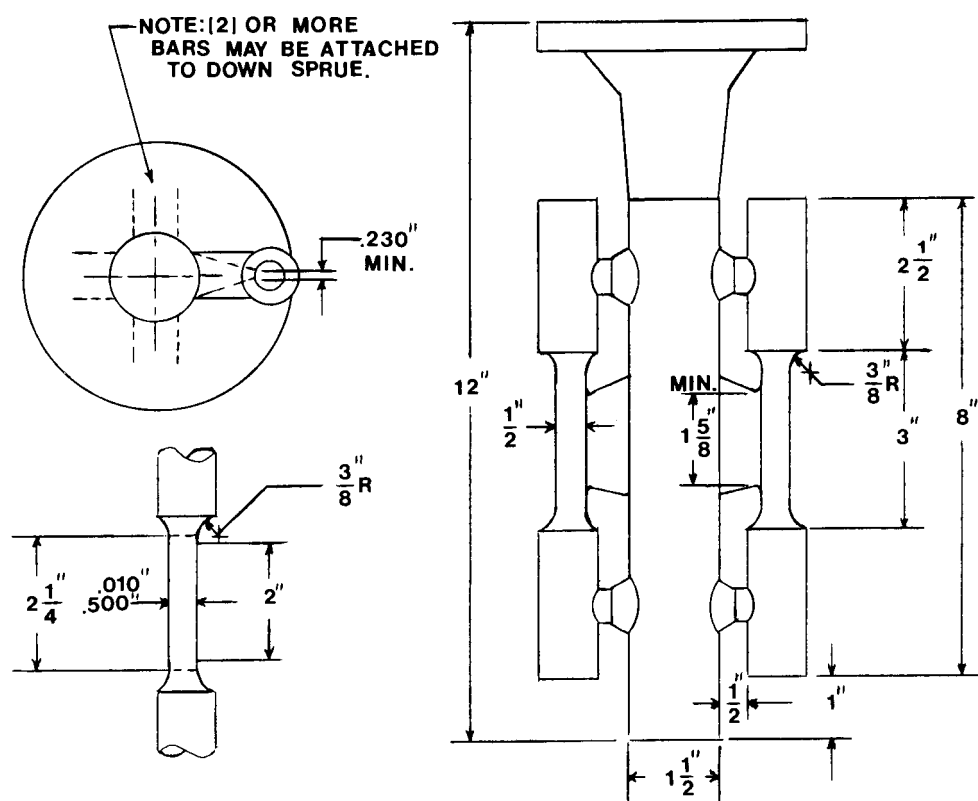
TEST COUPONS FOR CASTINGS (SEE TABLE 2 FOR DETAILS OF DESIGN)
